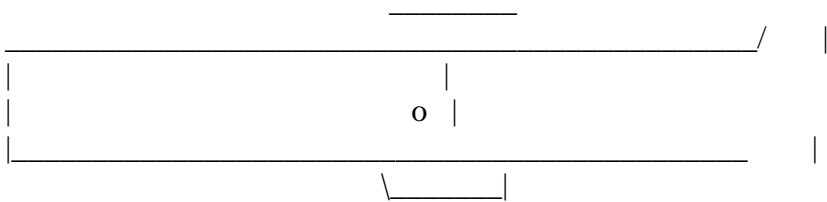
pipe with one end flattened and fuse hole drilled (top view)
